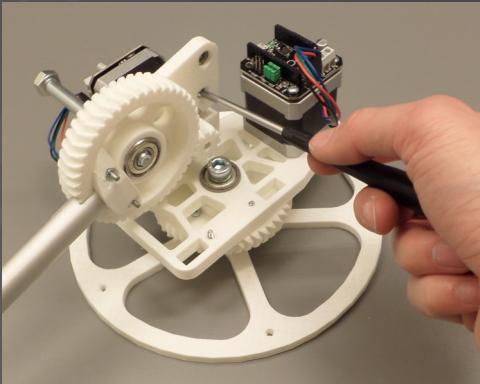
Now place the main bolt in the mounted side plate, slide the main gear on (with a washer between) and mount the motor.
